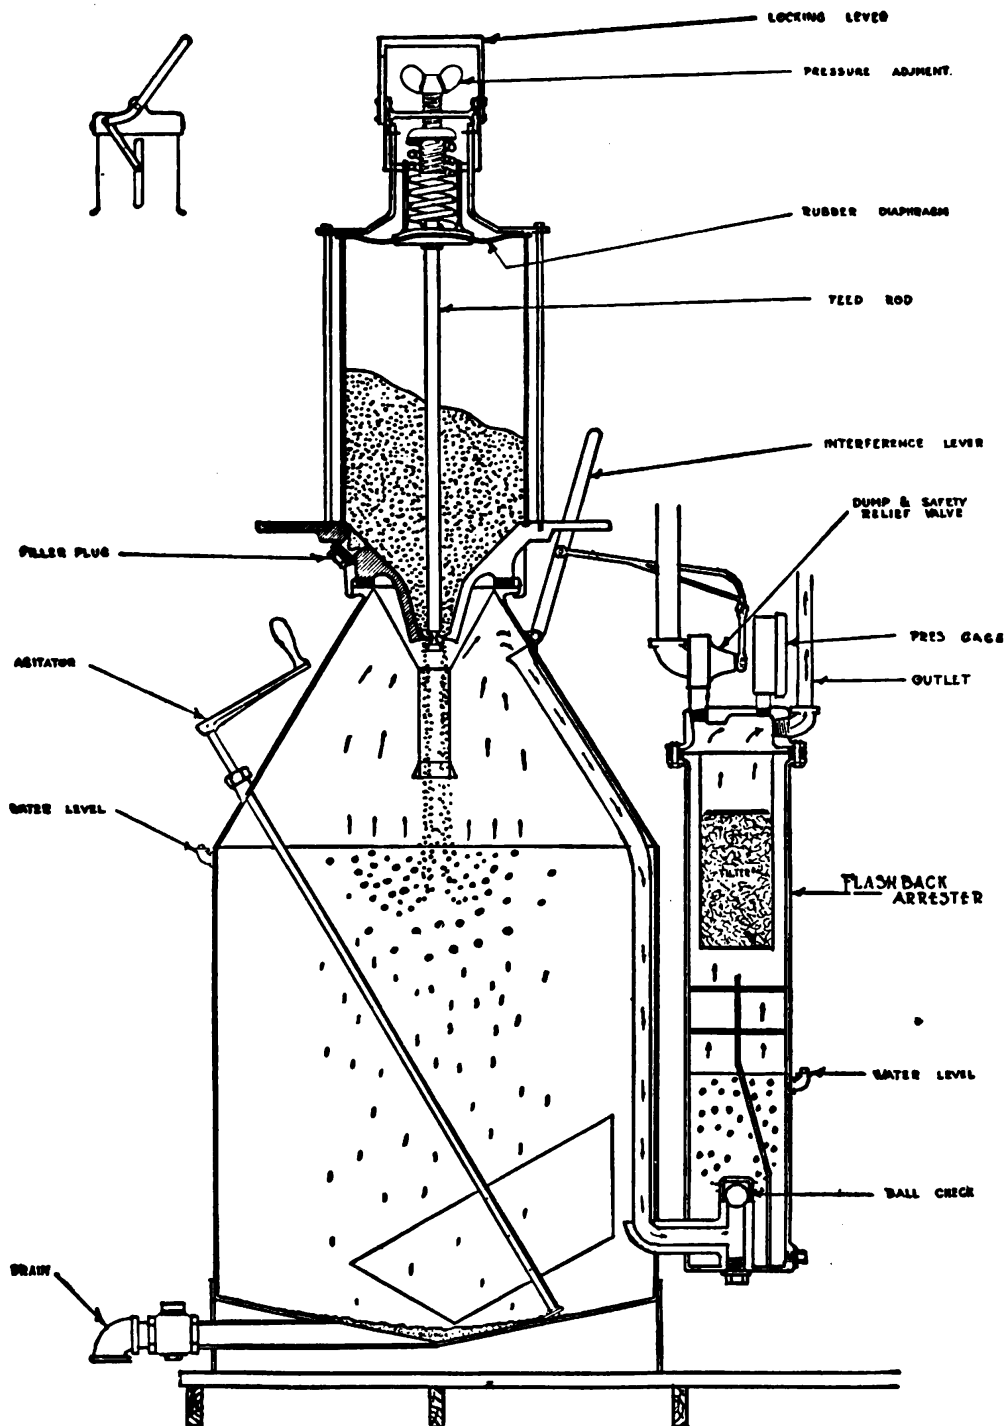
Pressure type carbide-to-water acetylene generator.
